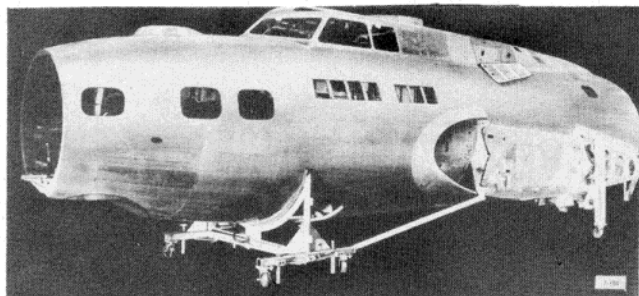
Fuselage Section Complete (Stations 1 to 6)
